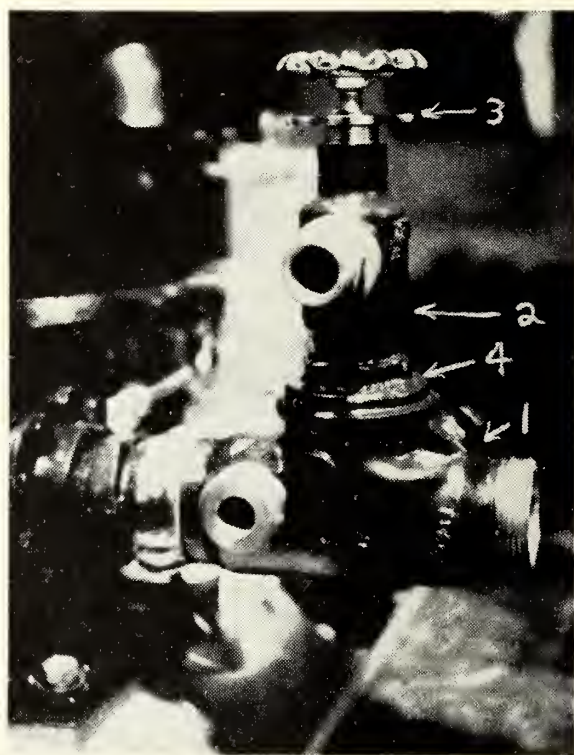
Complete pressure relief assembly: 1, Check and bleeder valve; 2, automatic pressure relief valve; 3, relief valve lock nut with finger wings; 4, point at which automatic relief valve is brazed to the check valve cover.
